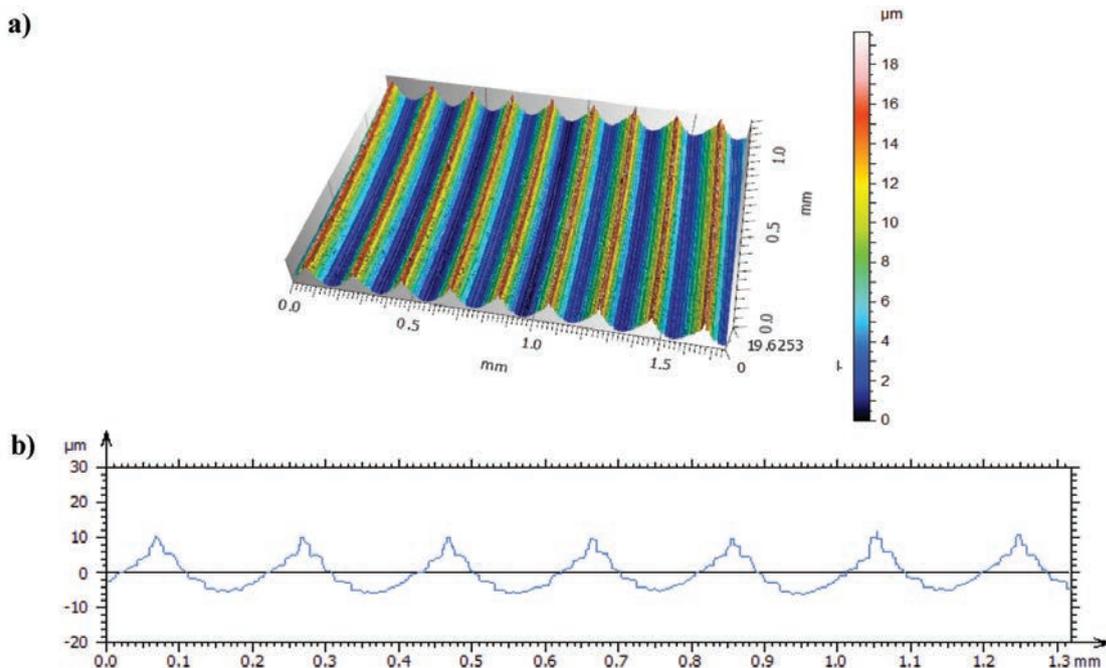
Surface texture of the edge of the workpiece after dry turning with cemented carbide cutting tool with a-C:H coating: a) isometric view, b) primary profile
